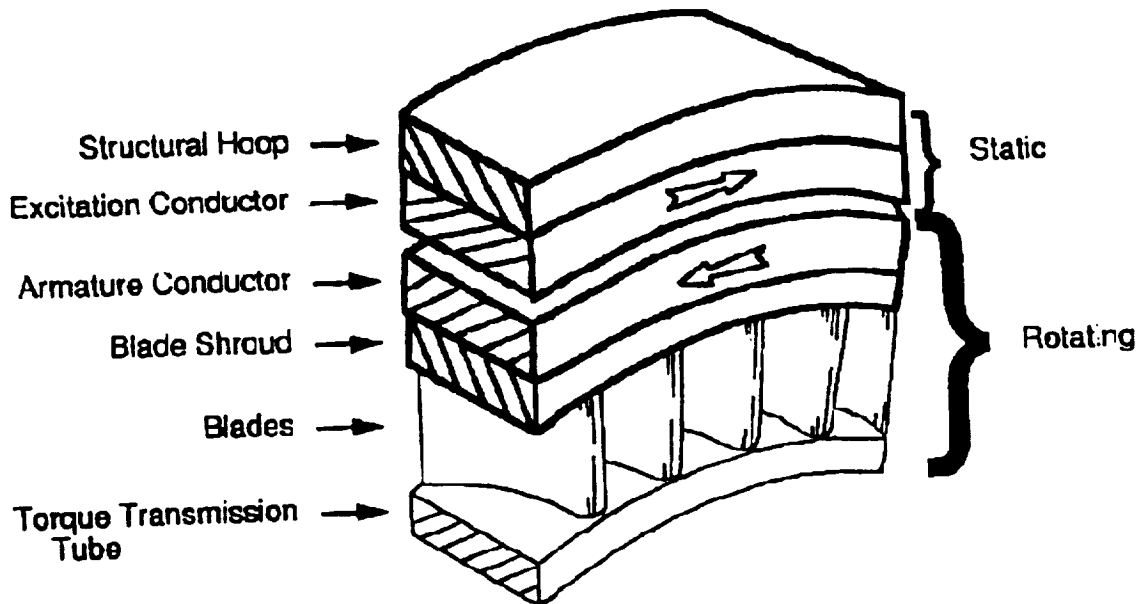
Centrifugal Loads are Transferred to a Static Structural Hoop
